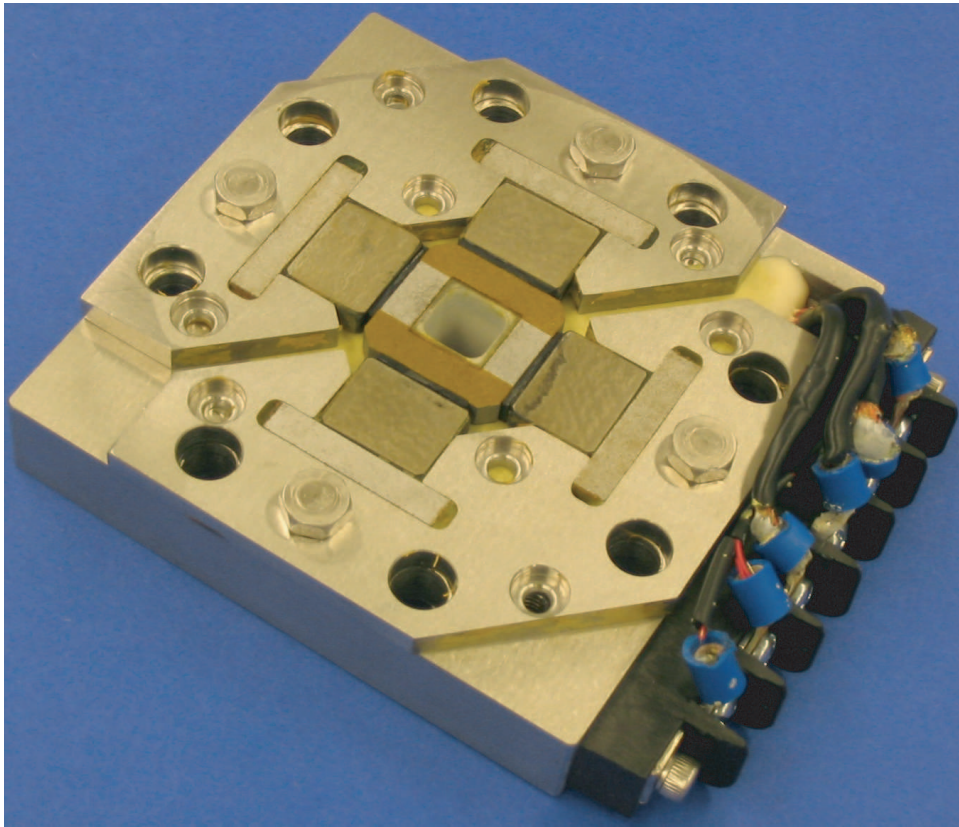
Pictures of the middle assembly installed in the front assembly.
